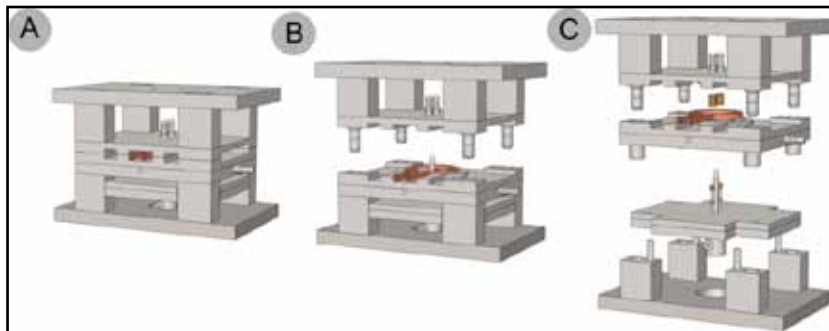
Compression mould with thermoforming added process, (A) closed position, (B) open position, (C) partially exploded view
